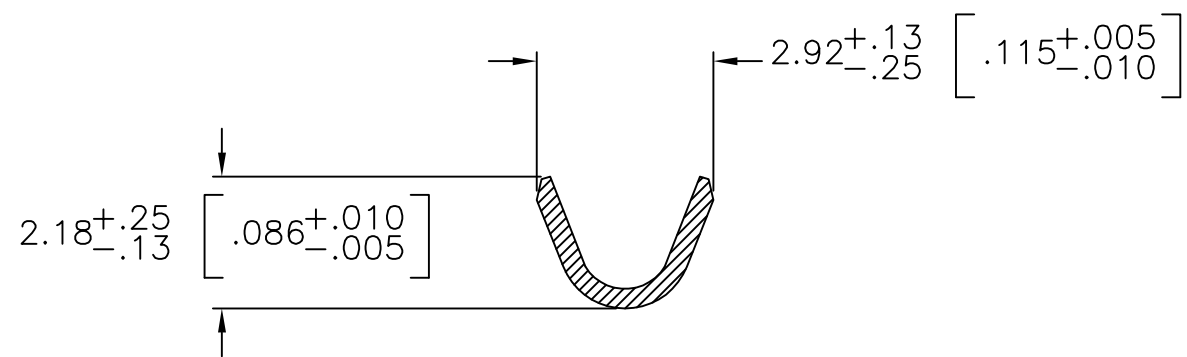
shows a cross-sectional view of a mechanical part. The dimensions and tolerances are as follows:
